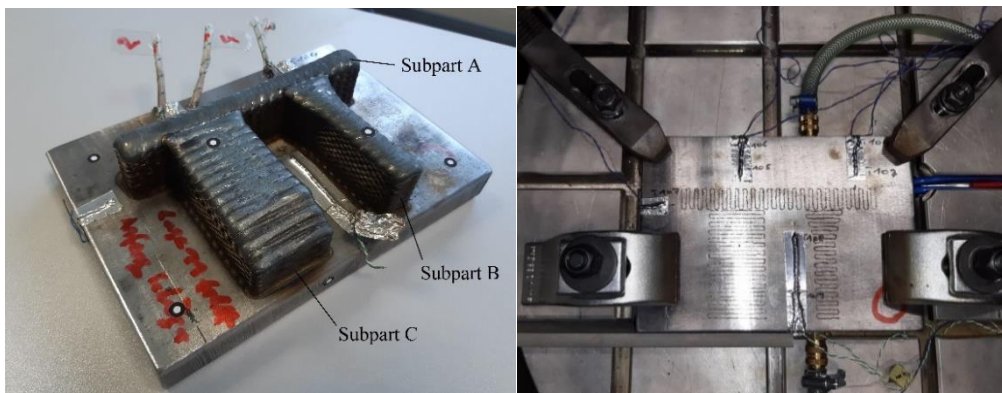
(a) Welded part after cleaning. (b) Clamped substrate with weld path applied by CMT-Marking process and temperature sensors
